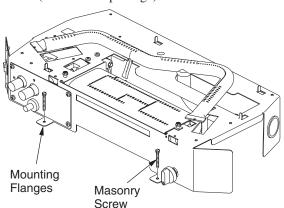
Attaching Base Assembly to Fireplace Floor (Base Assembly Will Vary According to Model)
